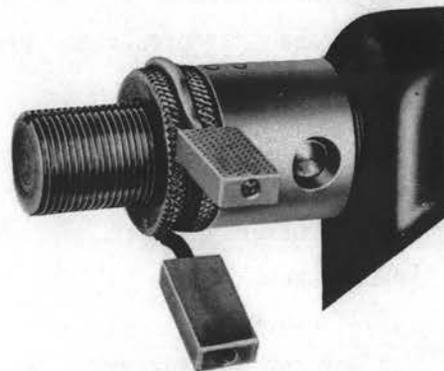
Position of No. 590A Oil Closure Cutter After Completion of Cut
